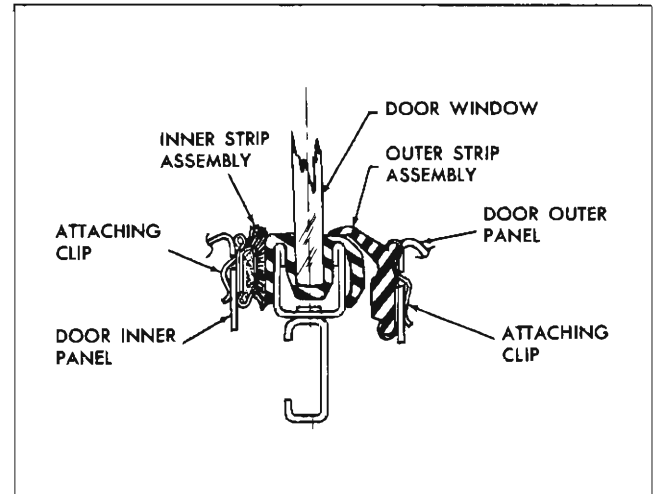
Front and Rear Glass Run Channel Inner and Outer Strip Assembly
